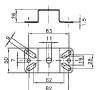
Picture B Magnetic holder (2 pieces) 8HG 004 806-001
